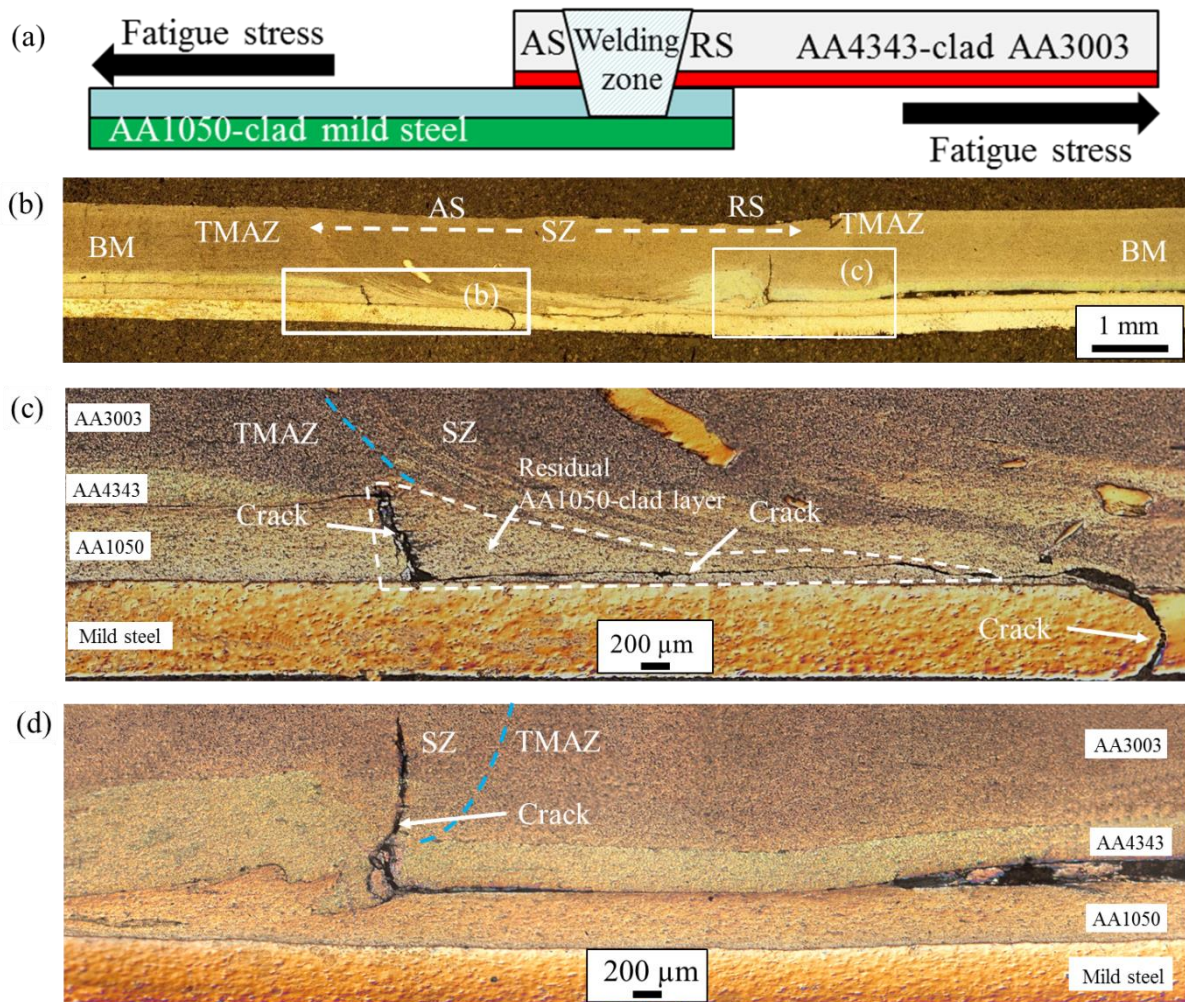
(a) Schematic of loading mode, (b) cross section of the fatigue fractured of RS-loaded joint (50 MPa), (c) fatigue fractured crack on the AS, (d) fatigue crack on the RS.
